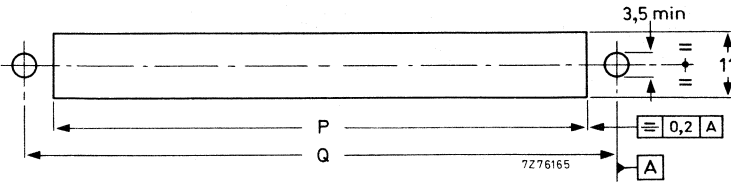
Panel cut-out; see Table 3 for dimensions P and Q.
